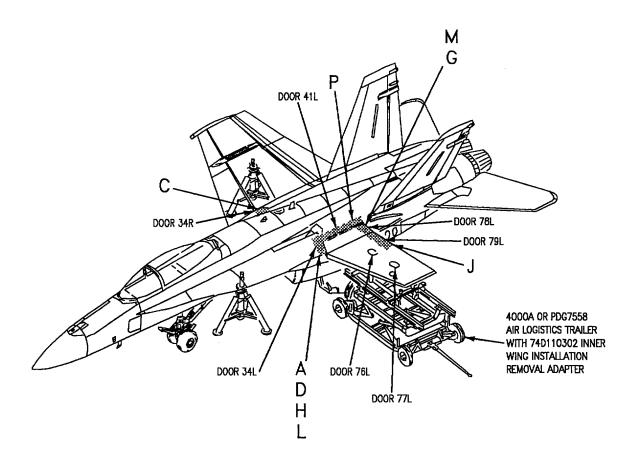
Inner Wing Removal and Installation Adapter (Sheet 8)
